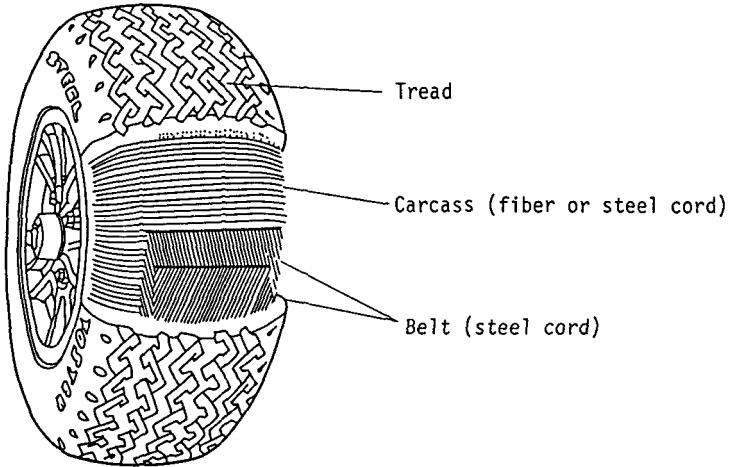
Construction of a steel-belted radial tire and typical use of steel cord.
